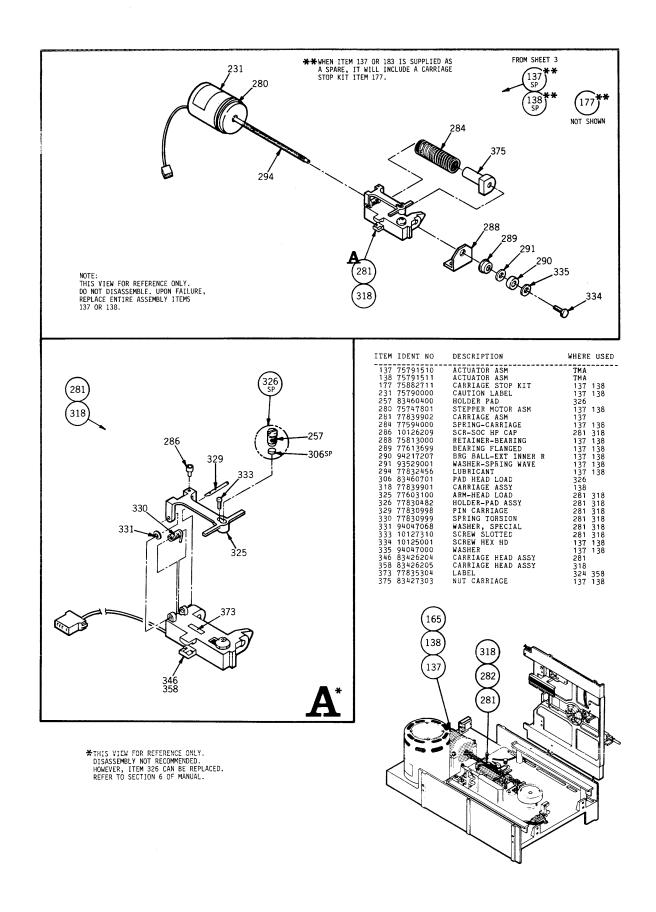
ACTUATOR AND CARRIAGE ASSEMBLIES
